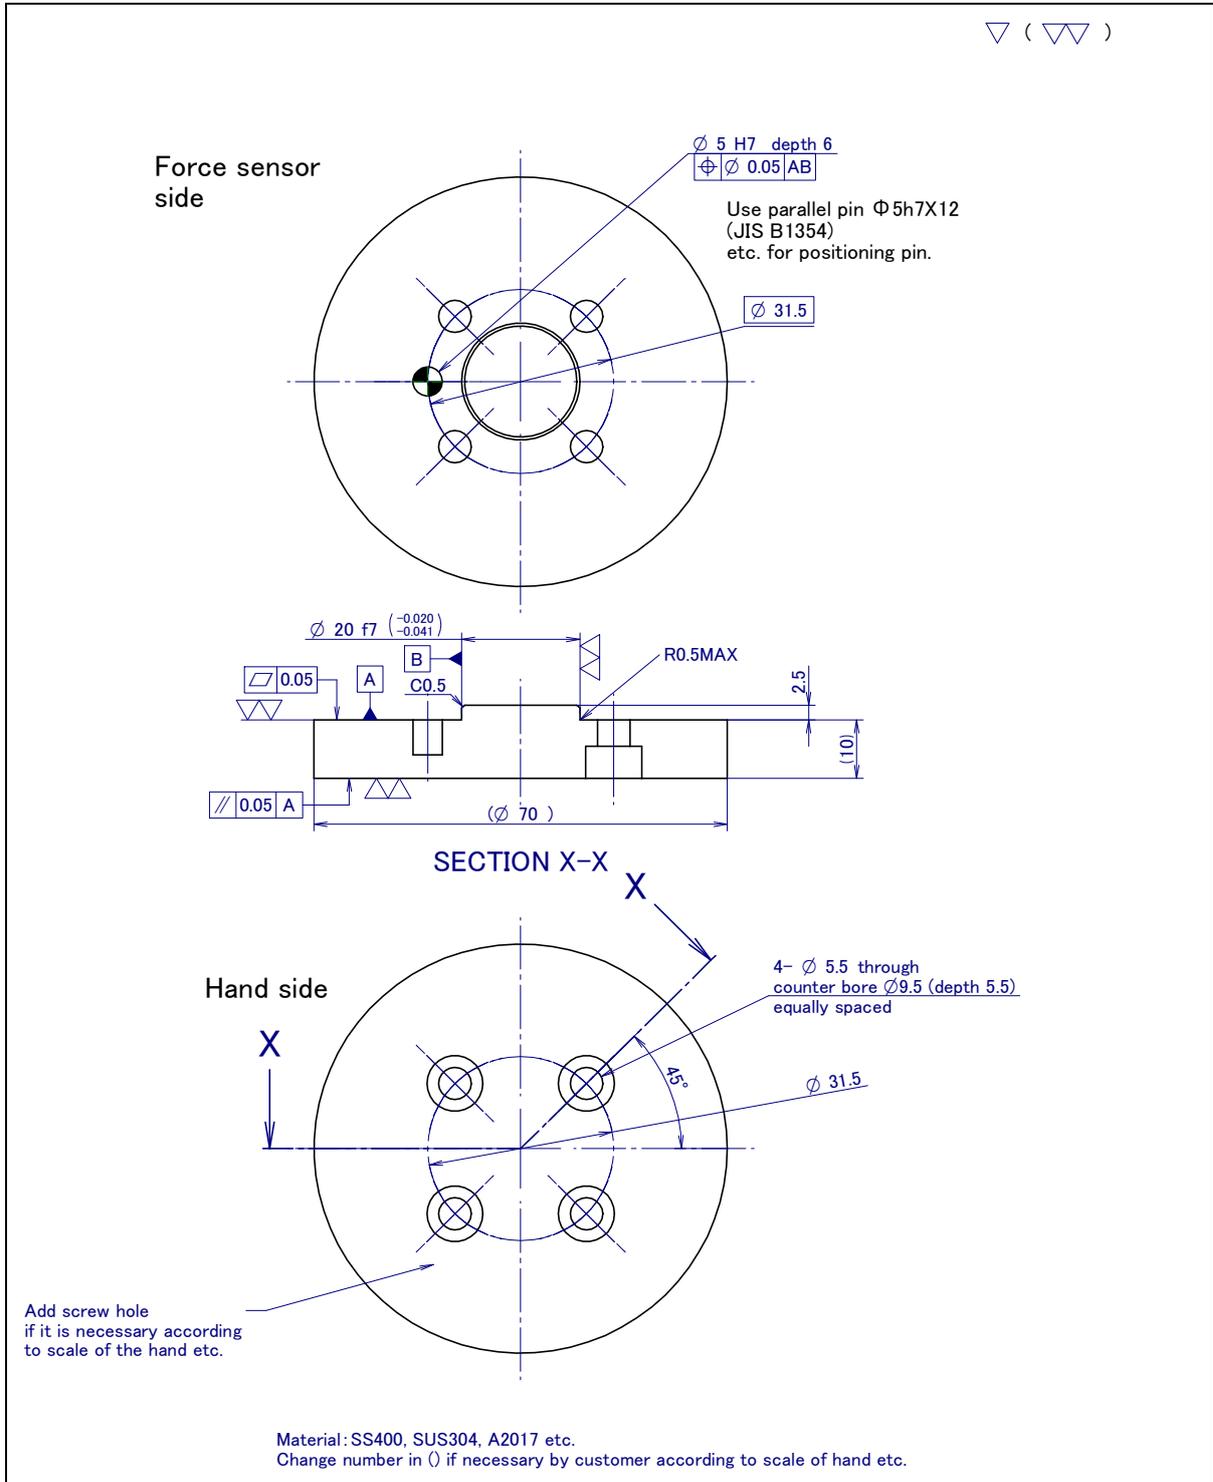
(a) Example of designing the hand mounting adapter (FS-15iA, FS-15iAe)
